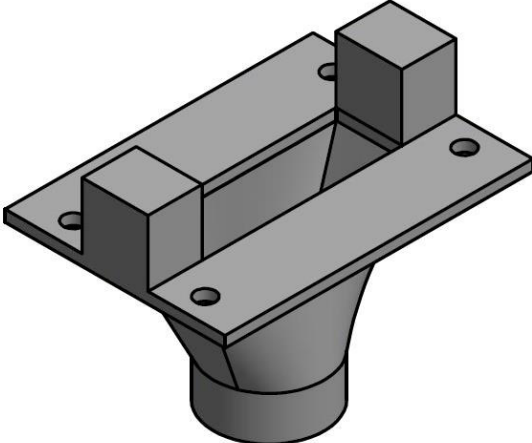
3D-printed powder chute to adapt a rectangular face to a circular face.
